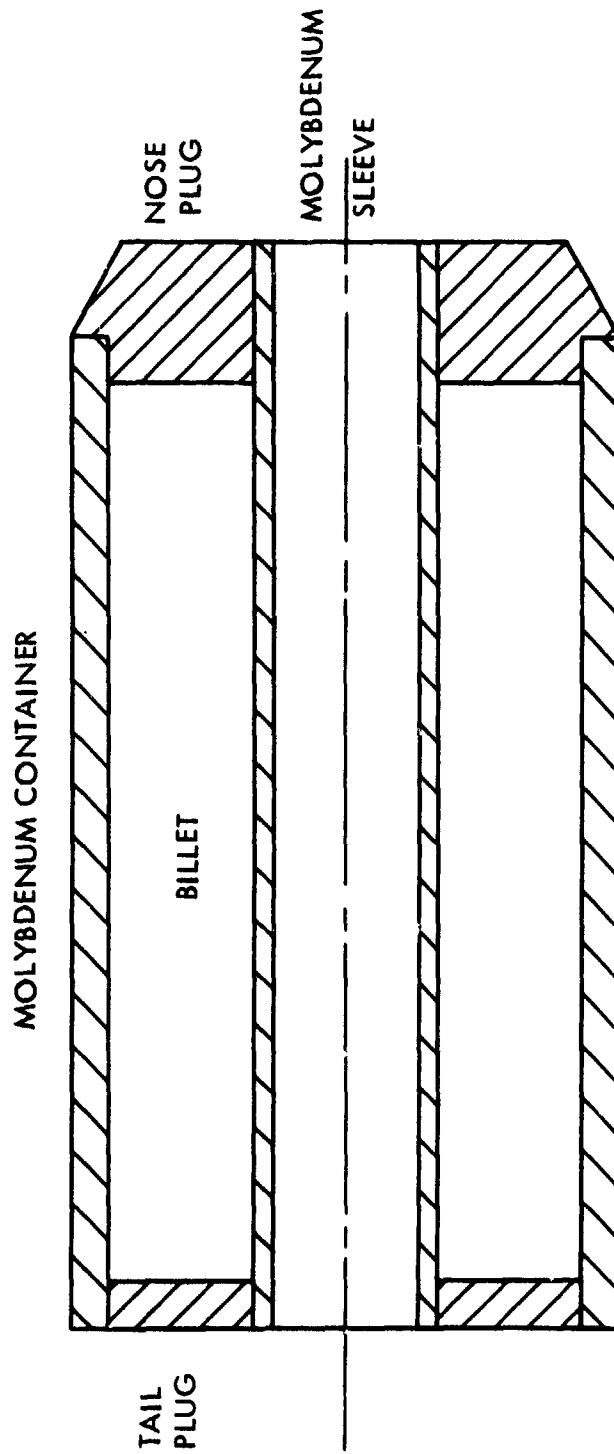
Cross Section of Canned Billet for Extrusion Over a Mandrel
